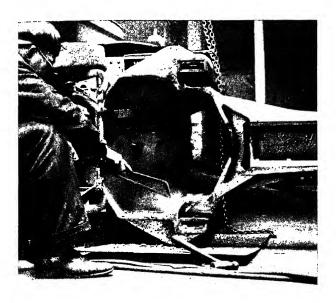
Welding the cast steel frame of a crane truck.
